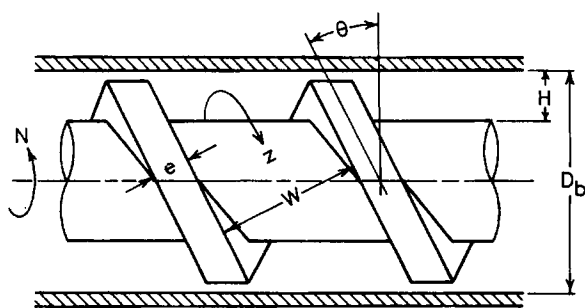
Geometry of an extruder screw showing characteristic dimensions.
